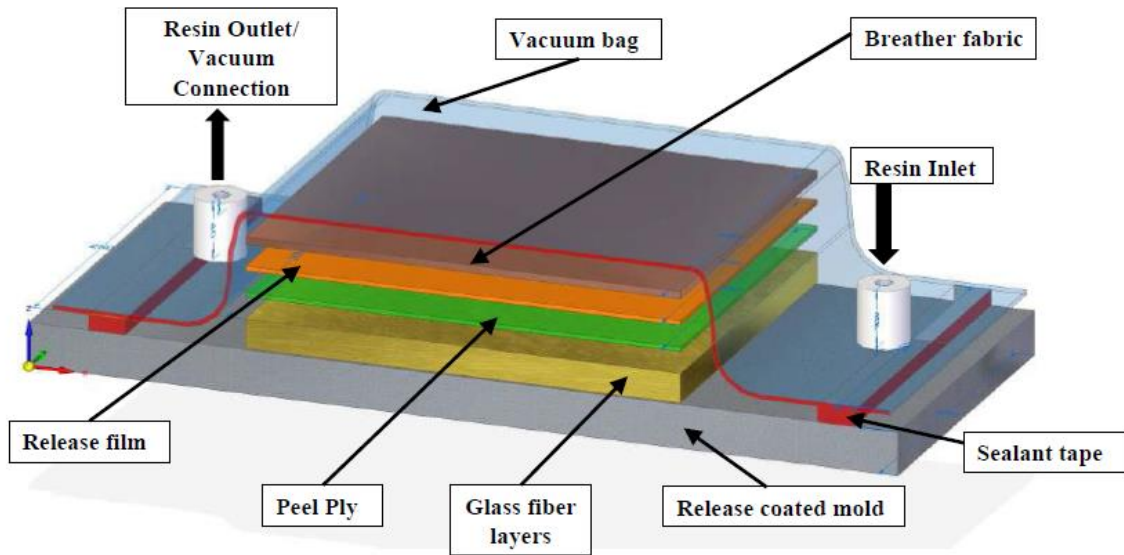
Schematic of the Vacuum Assisted Resin Transfer Molding (VARTM) process (section view)
